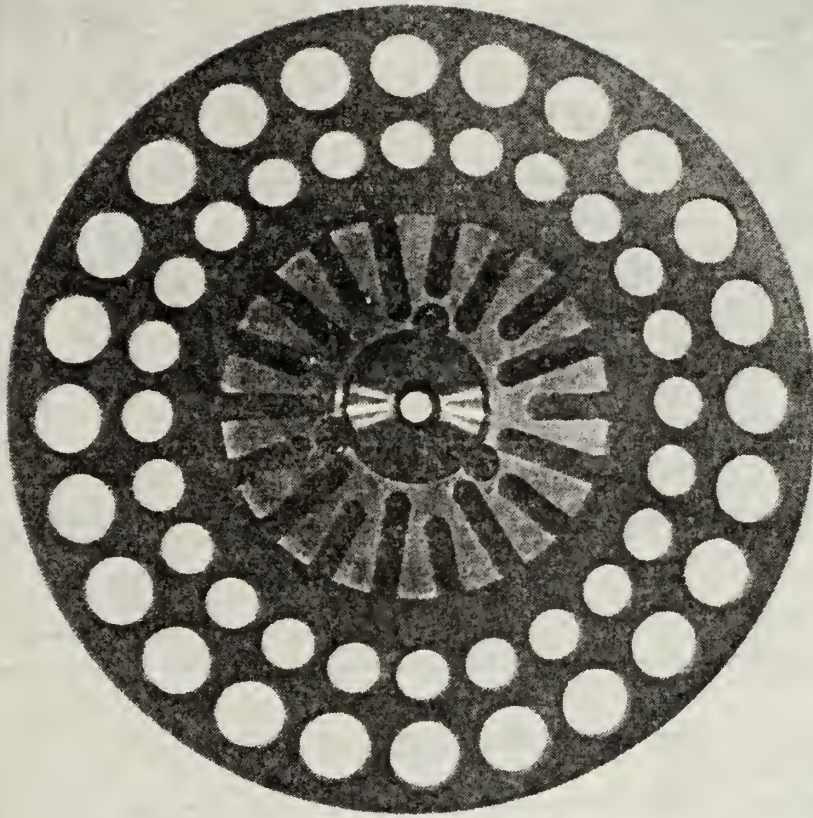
b) CLOSE-UP OF SLINGER ASSEMBLY
